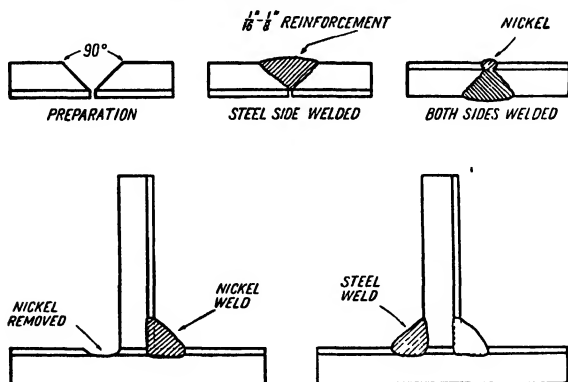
Double fillet weld. Nickel clad steel
